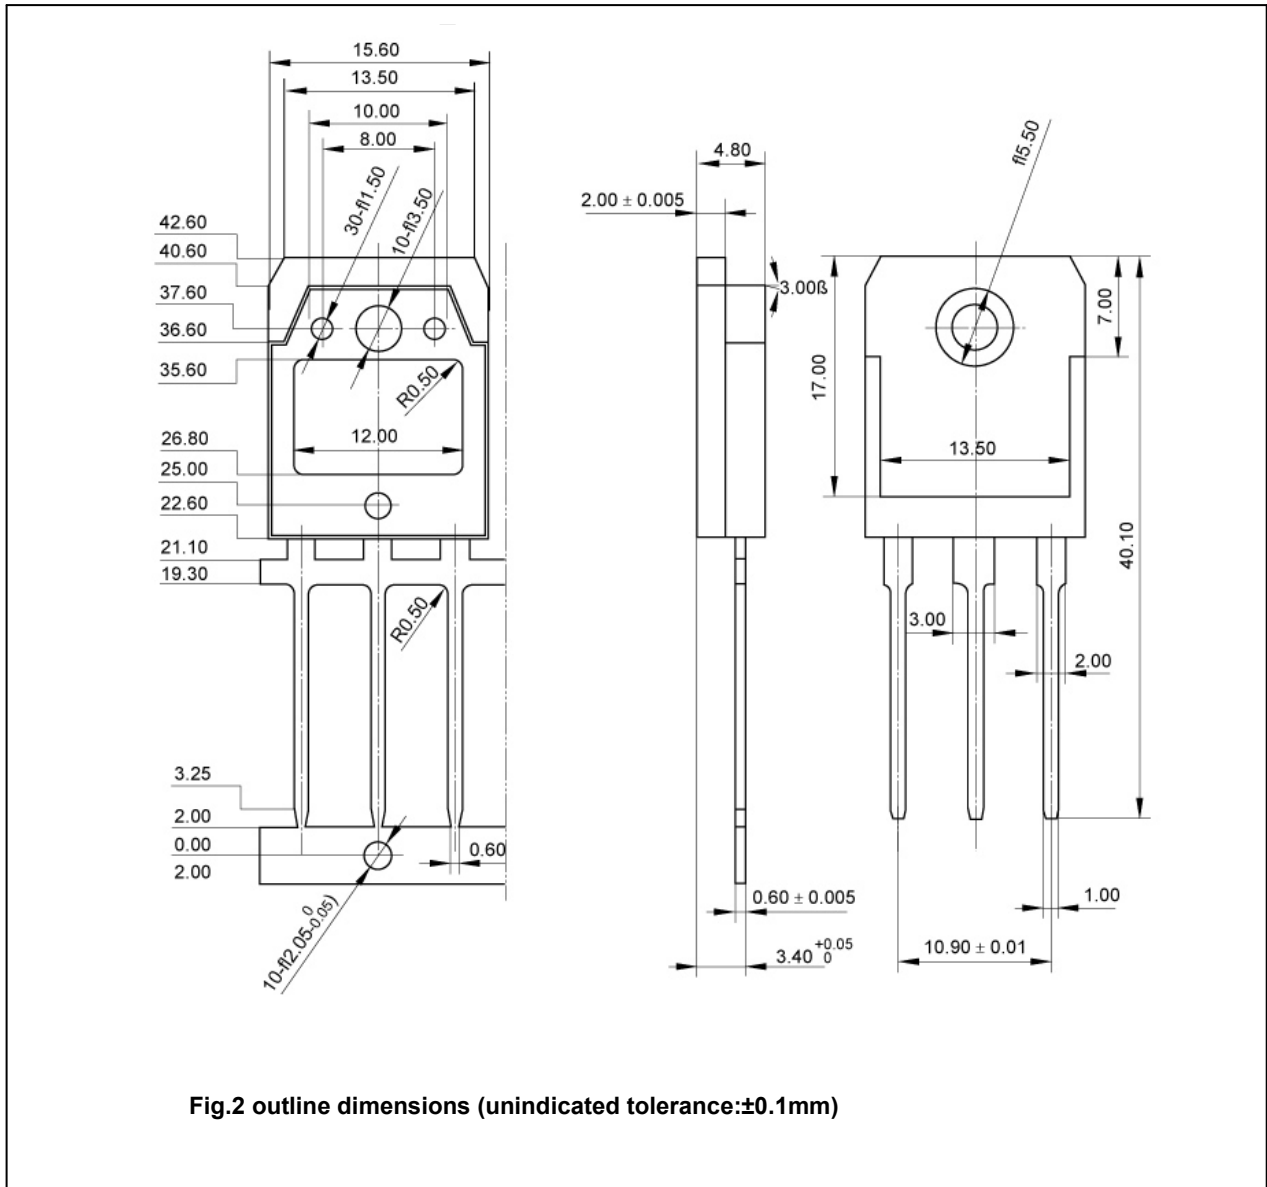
outline dimensions (unindicated tolerance: $\pm 0.1\text{mm}$)
